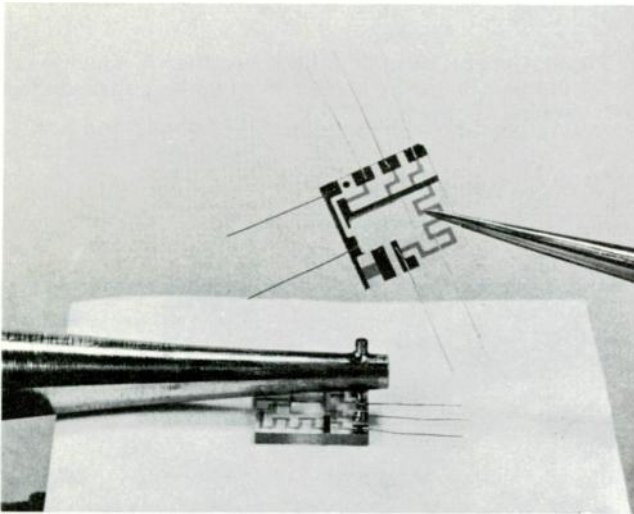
The ultrasonic welding of a .005 inch diameter aluminum wire to 2000 Å thick gold film.
